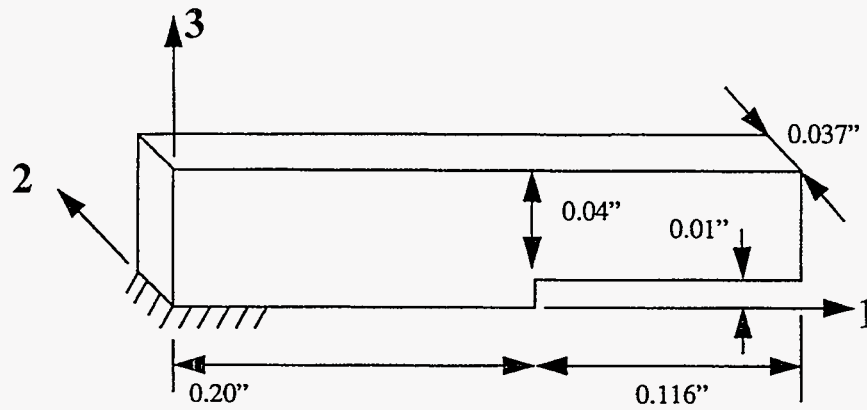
Dimensions (inches) of SL 5149 acrylate cantilever beam specimen for distortion (curl) measurements.
